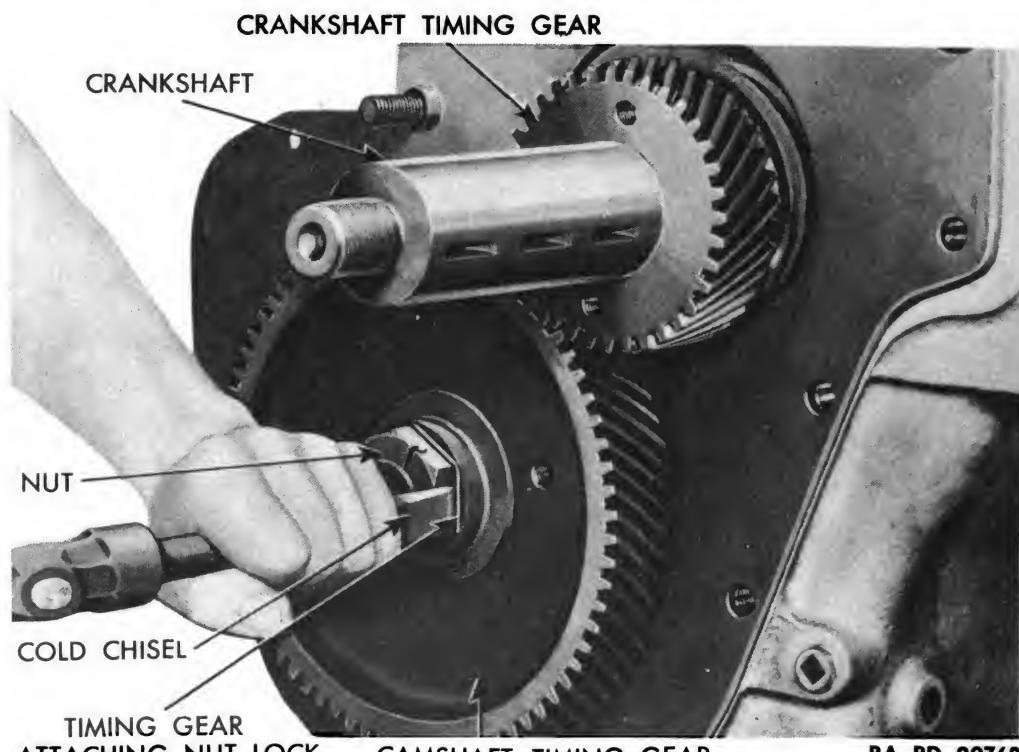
Straightening Edges of Camshaft Timing Gear Attaching Nut Lock
